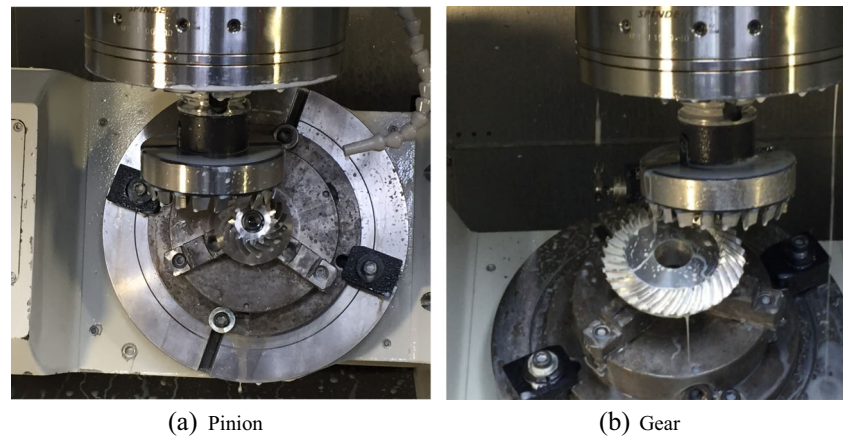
illustrates the cutting of the pinion and gear (material S20C) using the trunnion table type five-axis machine, which reveals the disadvantage of weak machining stiffness because of the large table tilting angle ($|\psi_a| > 45^\circ$) for machining the pinion. The figure also shows the finished workpieces of both gears, which are then inspected using a Klingenberg P40 gear measuring center. Before measurement, the nominal data [i.e., the basic data for the gear pair (MESINFO.CDS) and the positions and normal vectors of the topographic points (SOLL1.CDS)] are prepared and uploaded to the machine. Figure 15 shows the results: the sum of squares and tooth thickness error for the pinion are $10,077 \mu\text{m}^2$ (for $2 \times 9 \times 5$ points) and $-304 \mu\text{m}$, respectively, and those for the gear are $10,266 \mu\text{m}^2$ and $+19 \mu\text{m}$.
